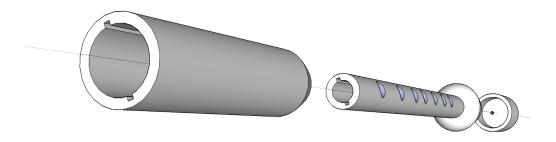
Chanter exterior 3D model showing slot for PCB in bottom and middle sections.
